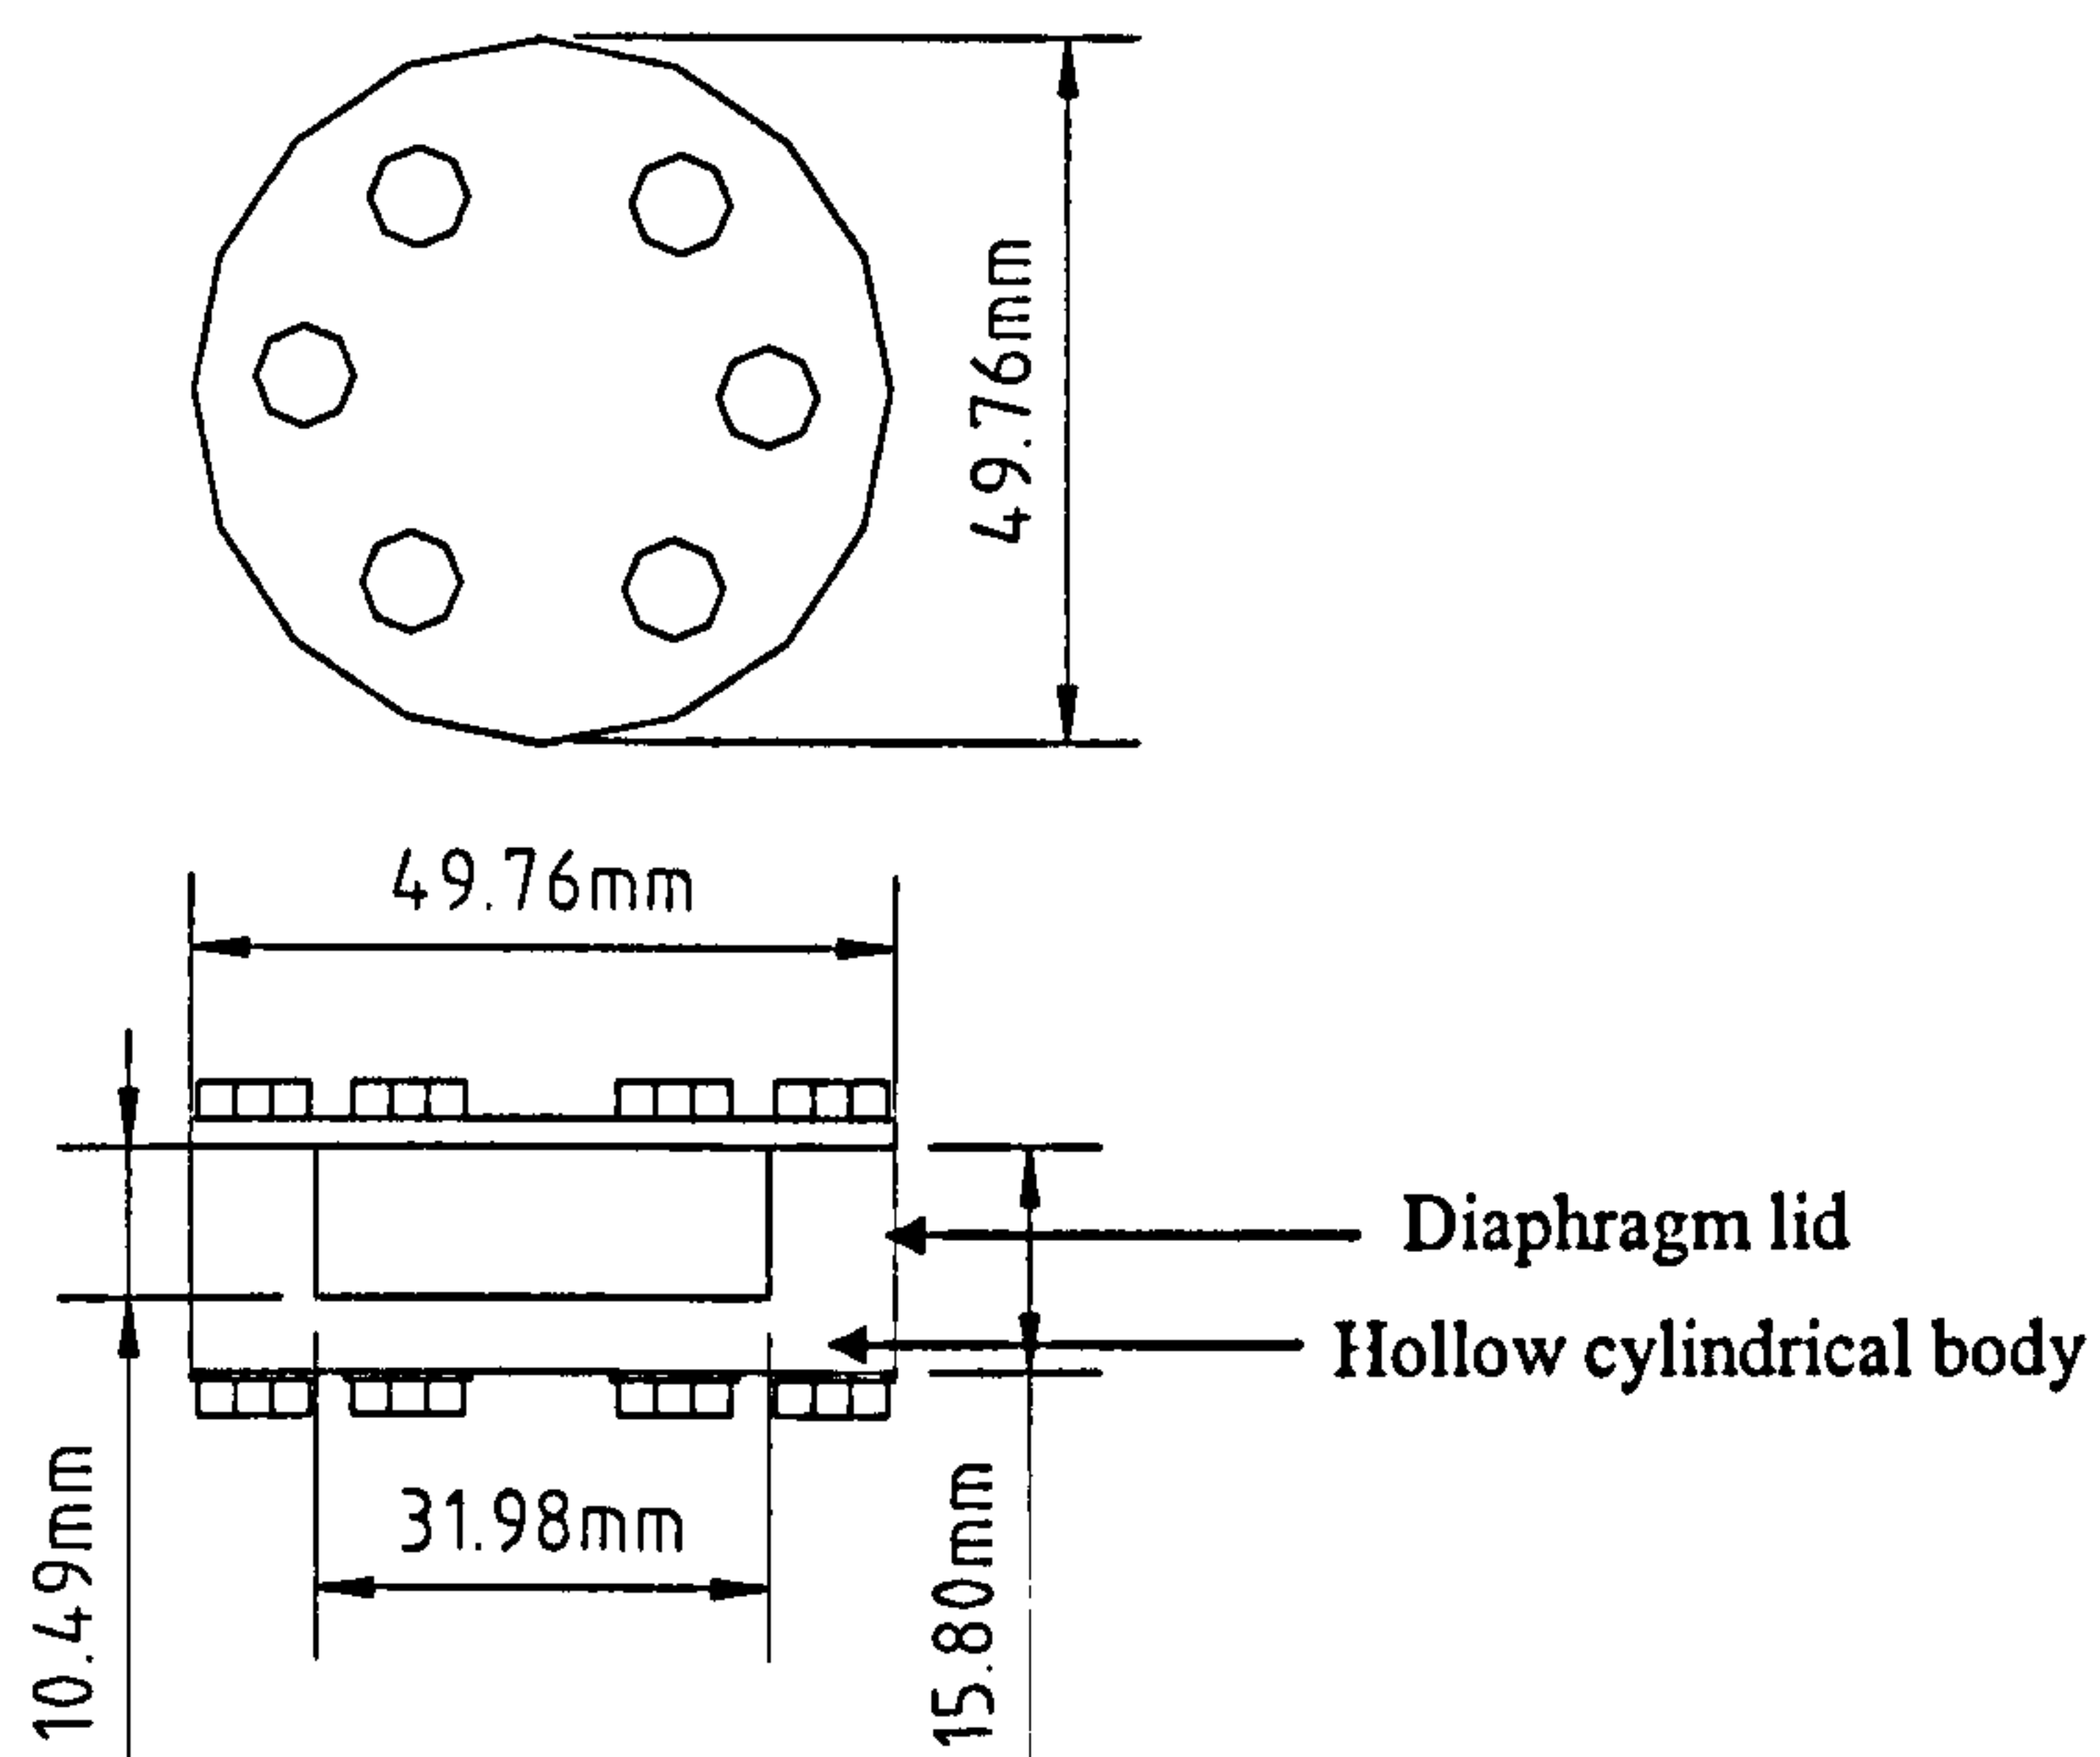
Plan and cross-sectional elevations of a DPG
